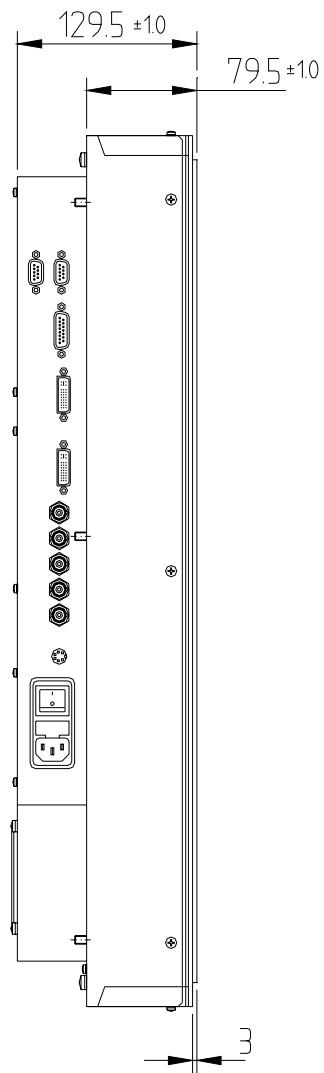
Raptor SQ2801 Dimensions (Chassis version); Side View
